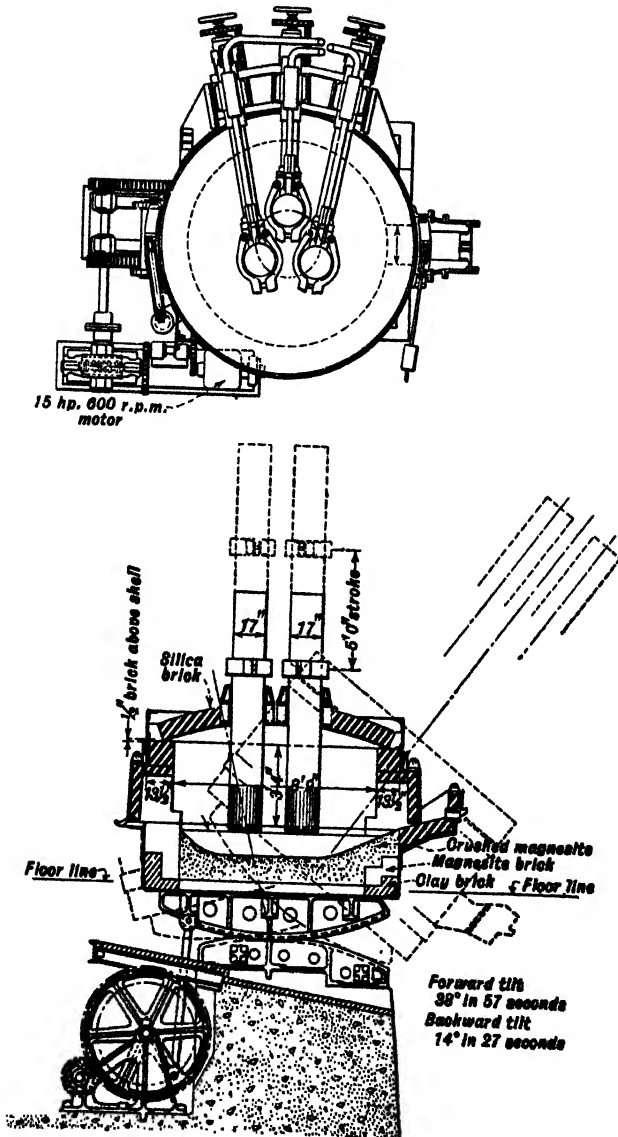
Section and plan of a 7-ton Heroult furnace.
